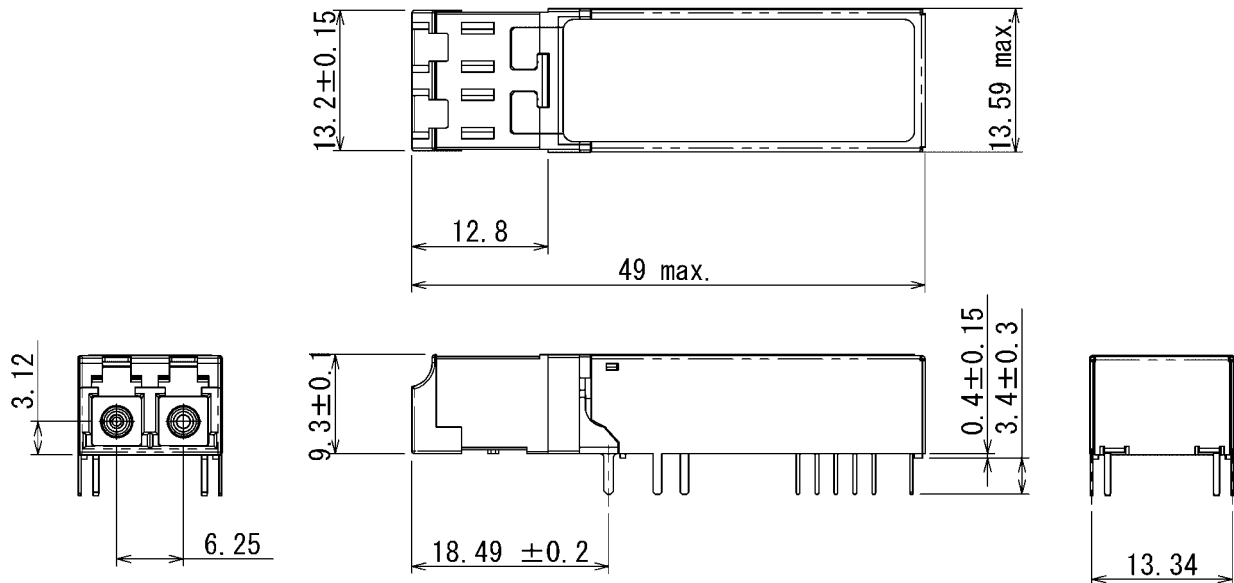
Outline Dimensions (SCM6408-GL-ZN)
